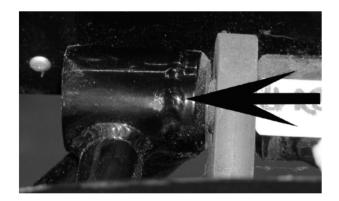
Original Engine Mount Weld Indicates Two (2) Piece Foot
